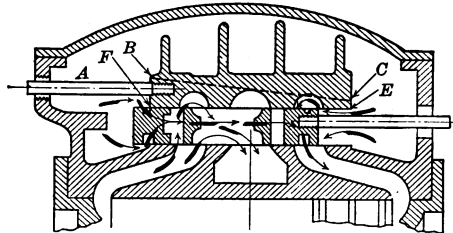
ADJUSTABLE TYPE OF PRESSURE-PLATE VALVE
